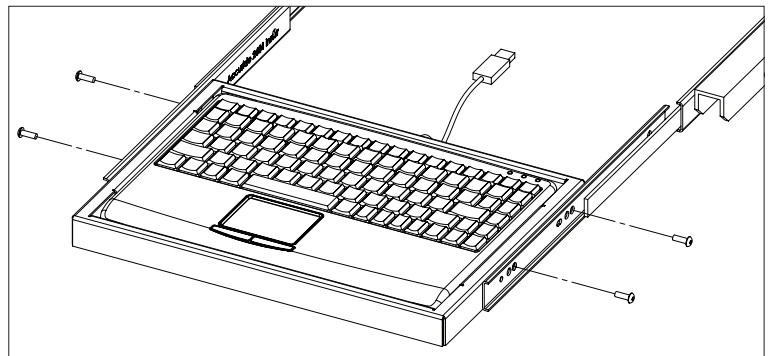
Figure C. There are floating, self-locking fasteners in the keyboard mounting brackets which prevent the screws from backing out. You will notice the snug fit when tightening the screws.
